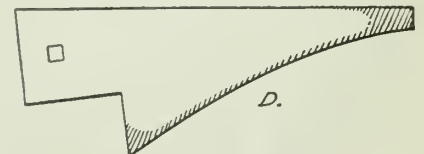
SHOWING APPEARANCE OF SHARE WITH PROPER SAND BUILT TO IT.
